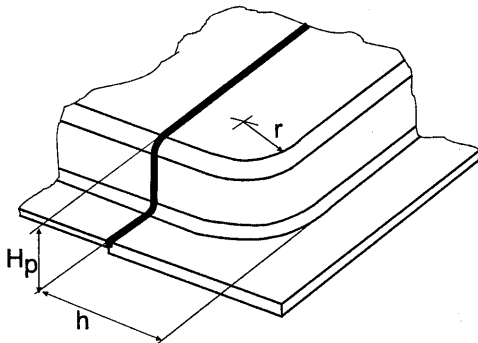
Definition of the weld position (h), corner radius (r) and the product height (H_p) for the deep drawing tests
